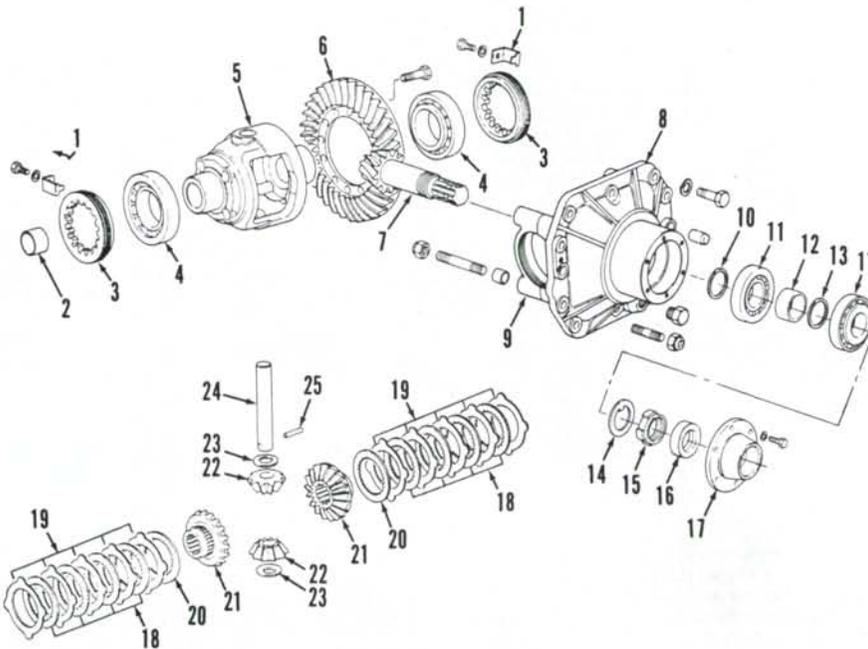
Exploded view of Carraro Type 709/19 front drive axle limited slip differential assembly.
